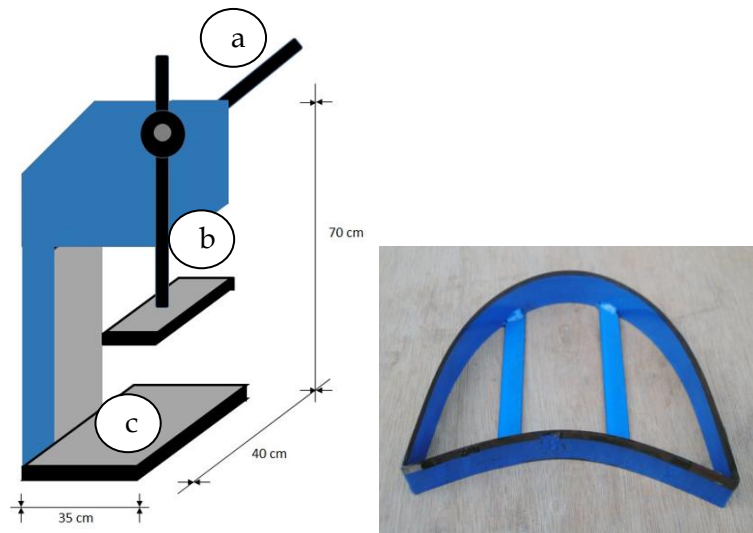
Slipper Upper Cutting Tool Design & Upper Cutting Knife
